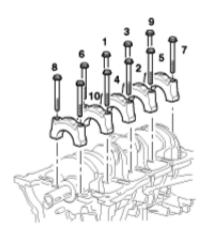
Identifying Bearing Cap Bolts Tightening Sequence Courtesy of HYUNDAI MOTOR CO.
